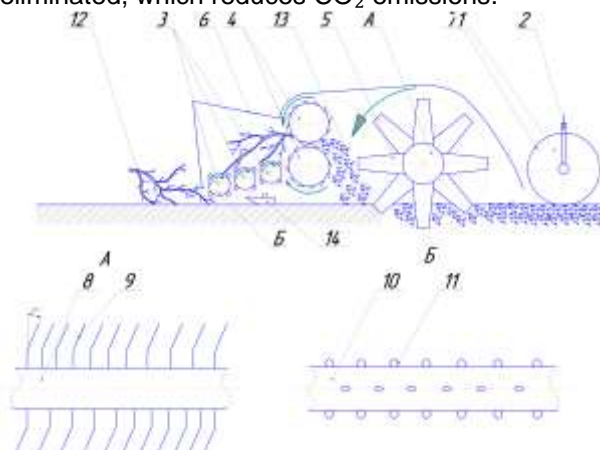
Structure and operation of the design machine: 1 – Support wheel; 2 – Soil cultivation depth adjustment screw; 3 – Feed rollers; 4 – Crushing device; 5 – Cutter; 6 – Receiving plate; 7 – Deflector plate; 8 – Cutter shaft; 9 – Knife; 10 – Feed roller shaft; 11 – Scraper; 12 – Wood chips; 13 – Crushed chips; 14 – Soil relief copier.
